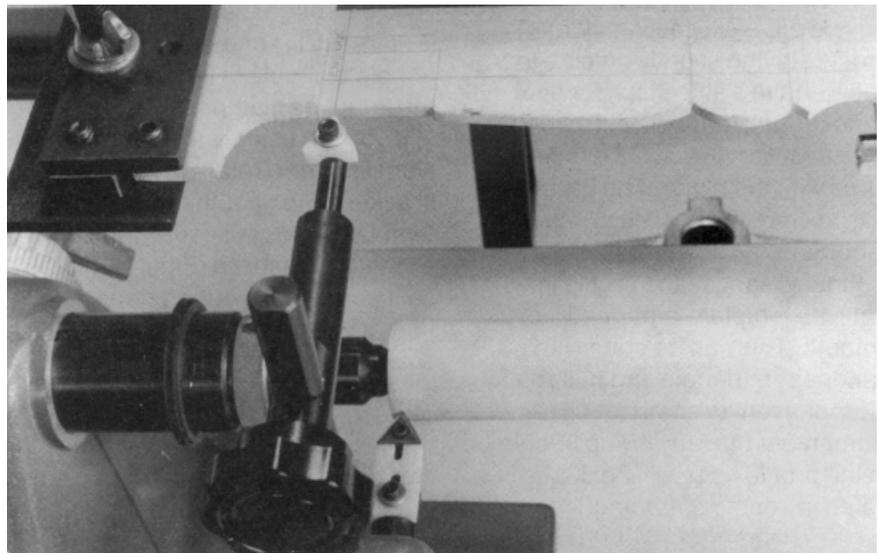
Make certain both end lines are inside the ends of the workpiece.
